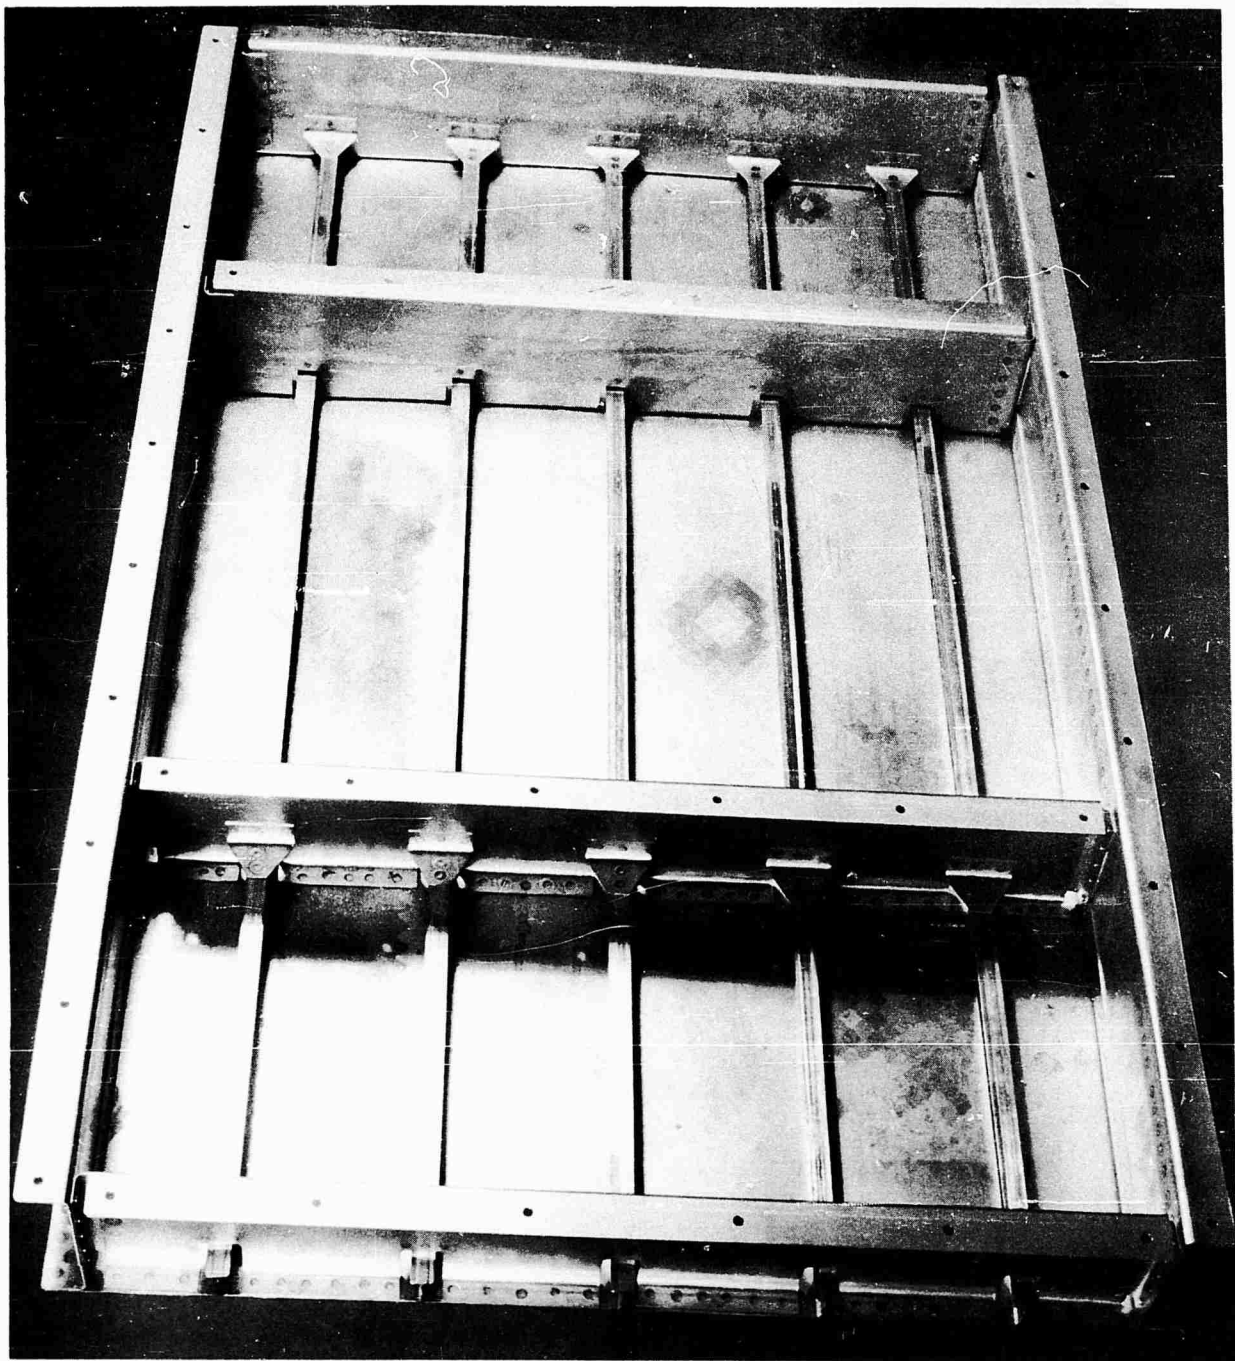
SKIN AND STRINGER - LOWER COVER REMOVED
